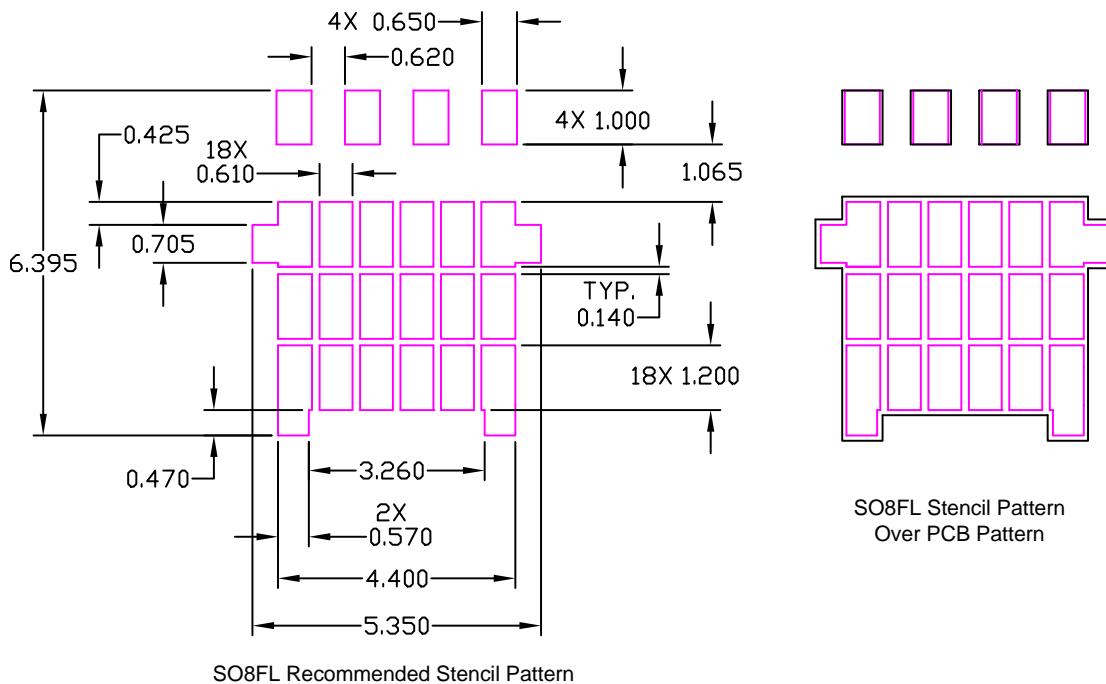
Solder Stencil Design Illustrating how Stencil Openings are Divided into an Array for Large Die Pads
